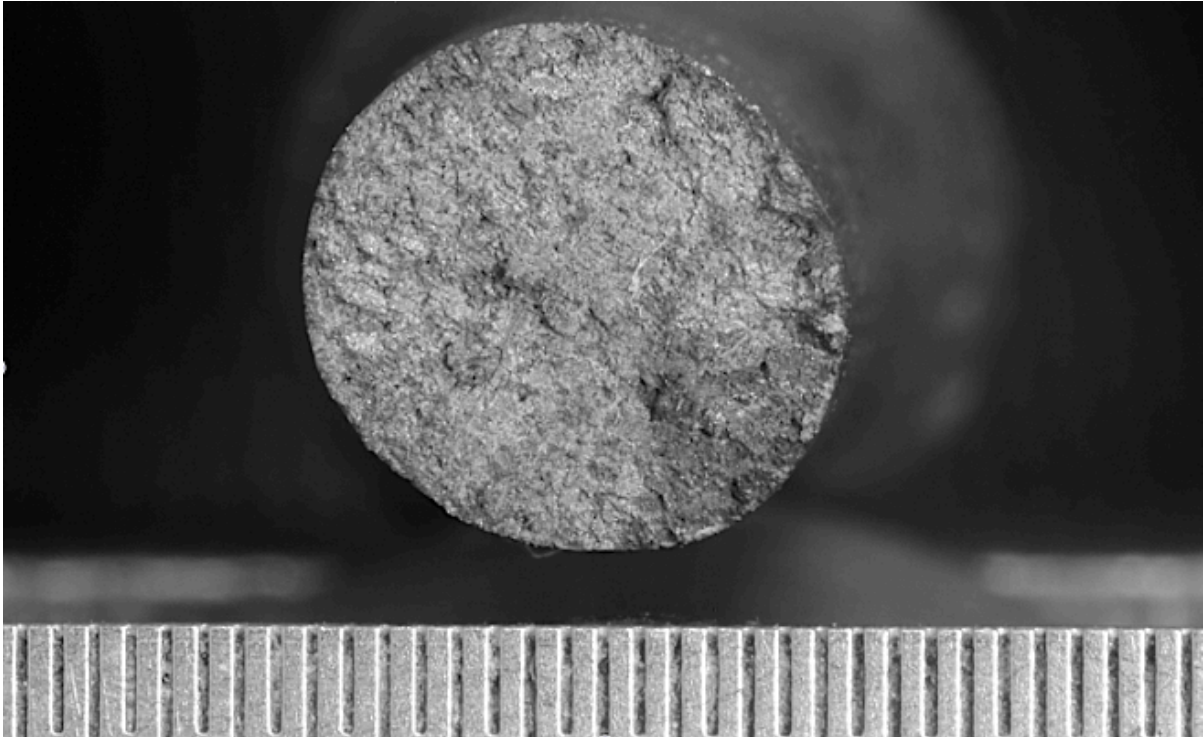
Macro-photographic image of the fracture surface of the specimen S9 halve demonstrated on the right-hand side in figure 46.
